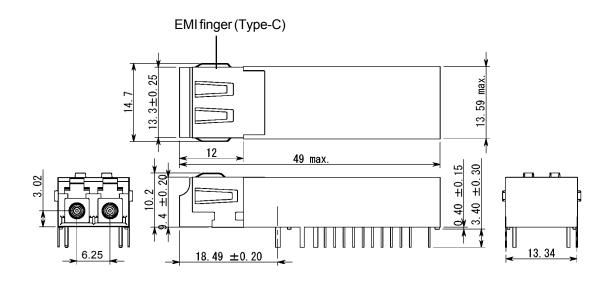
Outline Dimensions(SCM6005-GL-Z#)
